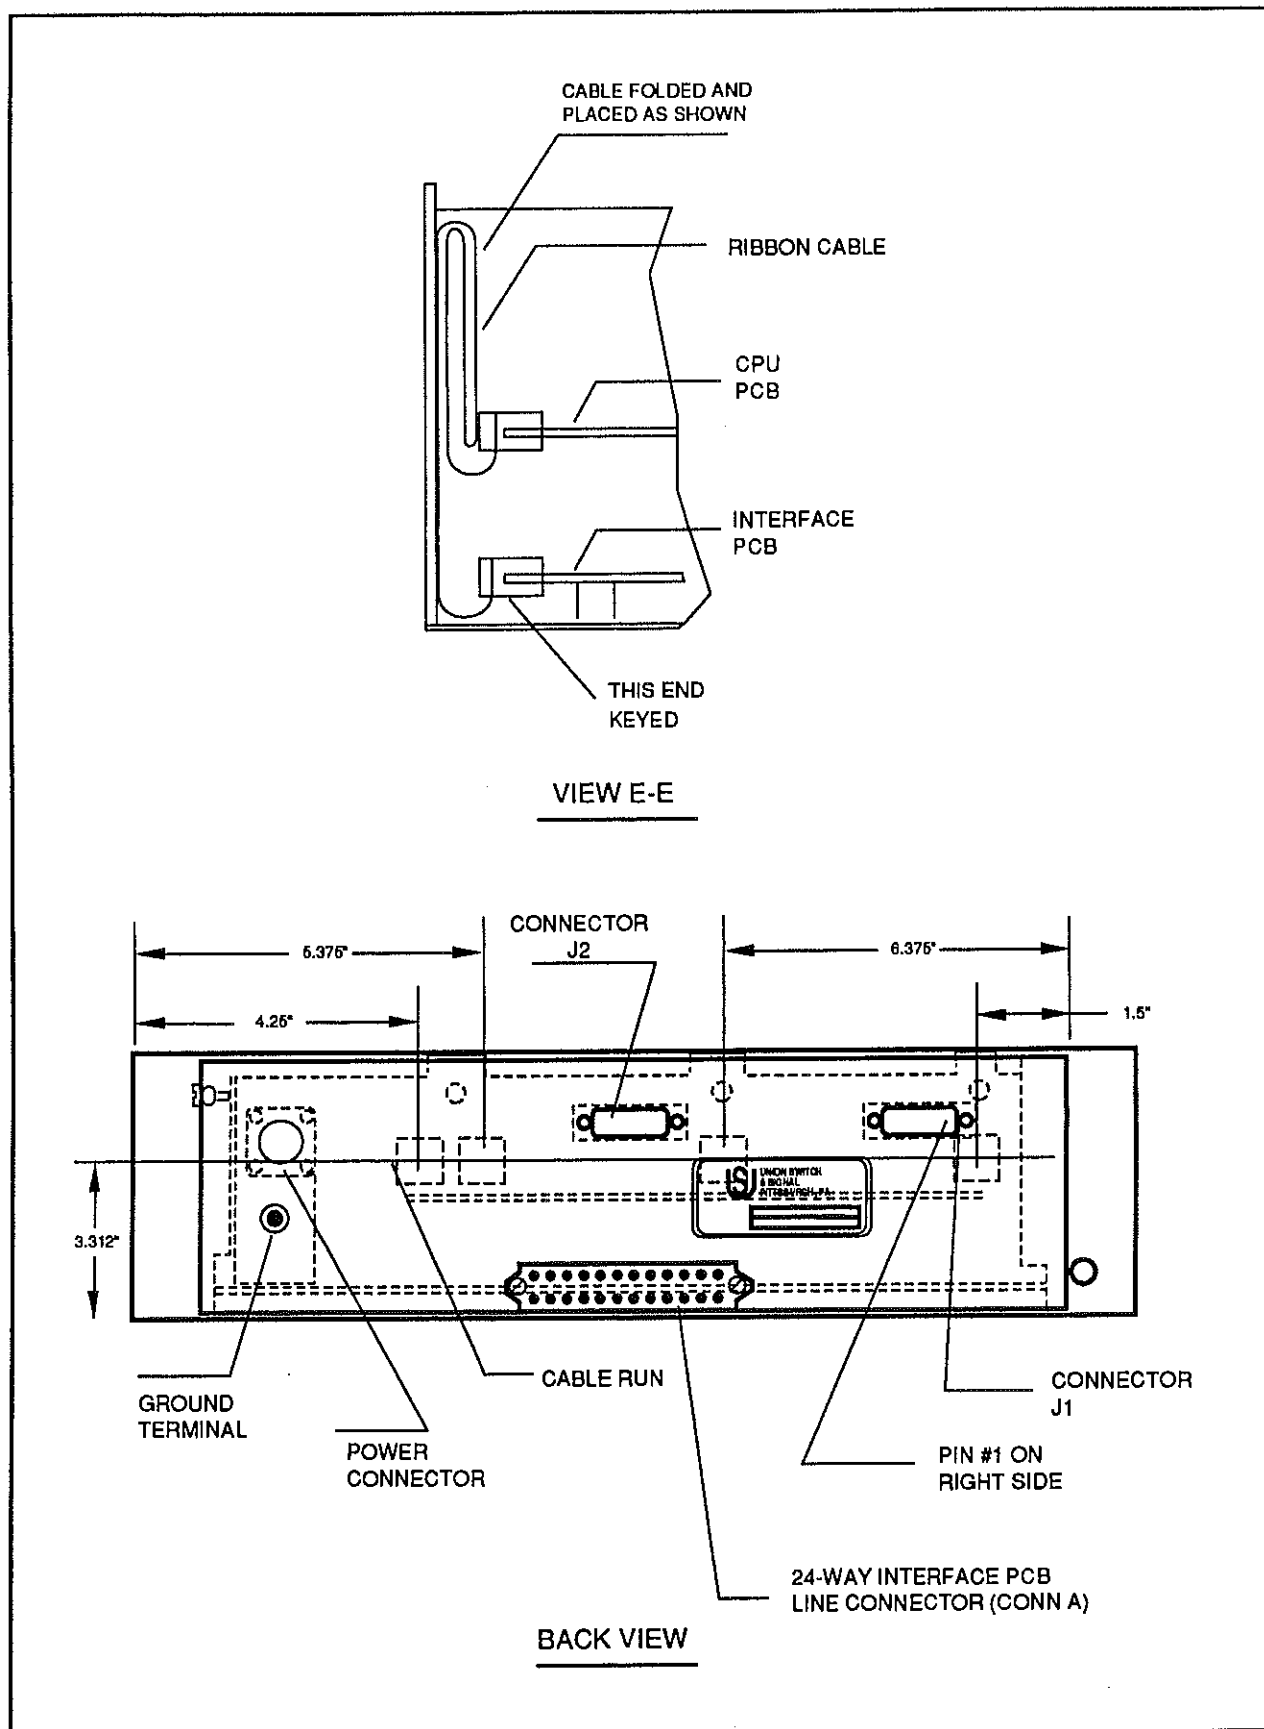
TWC-1000 Unit, Major Components and Dimensions (Sheet 3 of 3)
